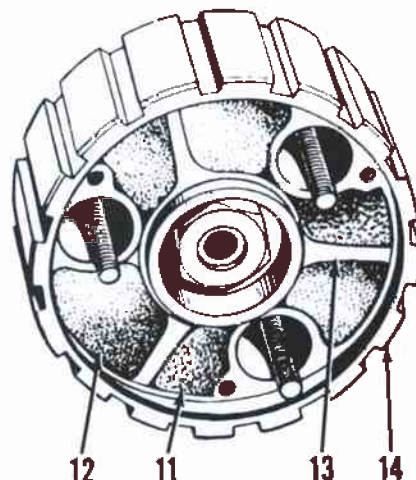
Clutch cushions should be installed as shown. Use soap if necessary when installing, but do not use oil or grease.
